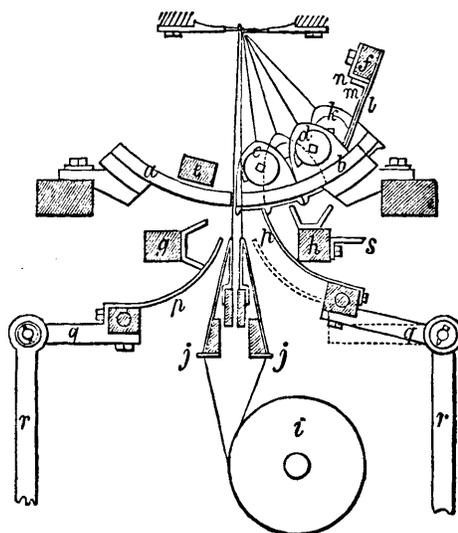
Croft's Machine for Bobbin-net Breadths with Selvages.
